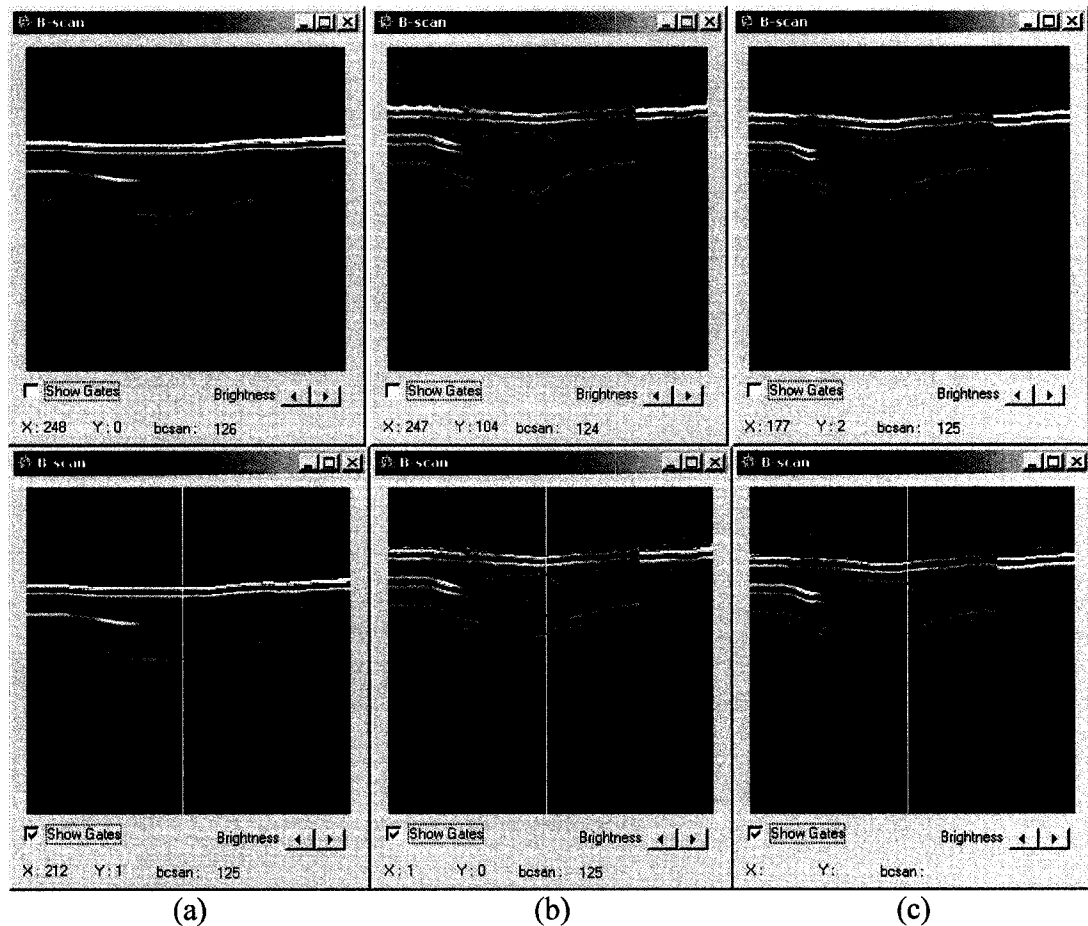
The ultrasonic B-scans of the welds and corresponding recognized patterns. (a) stick weld, no internal structure is detected; (b) good weld with both solid-liquid interfaces detected; (c) good weld with only one internal interface detected.
